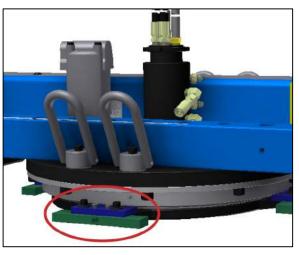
SURFACE MOUNT KIT ASSEMBLY
